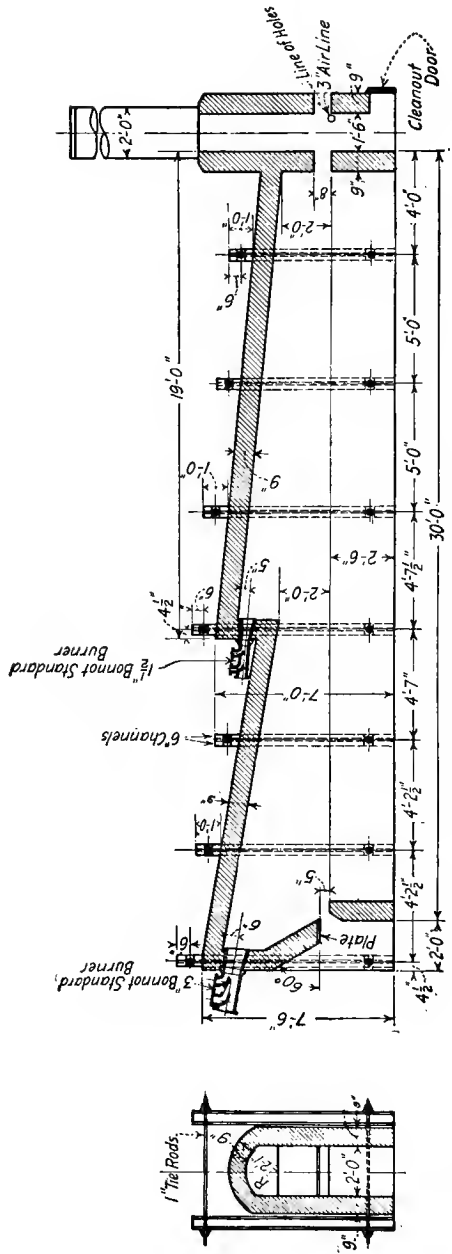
shows a rivet making furnace operating with pulverized coal at the National Bolt and Nut Company. This
